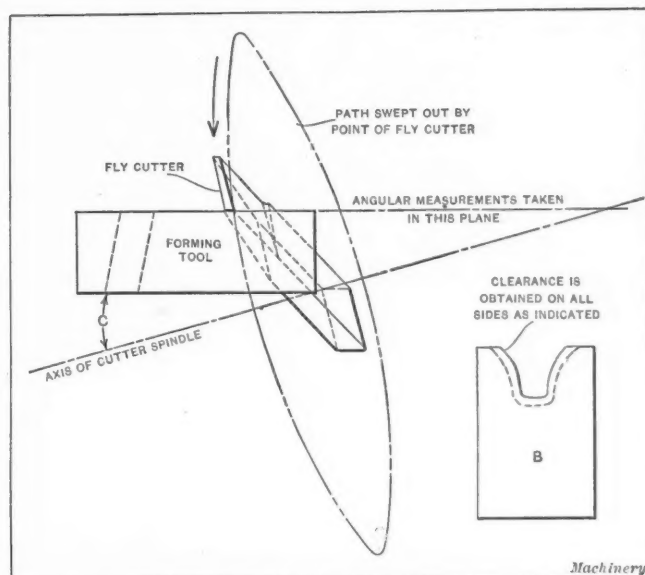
Method of setting the Fly Cutter to give the Required Side Clearance to the Forming Cutter
